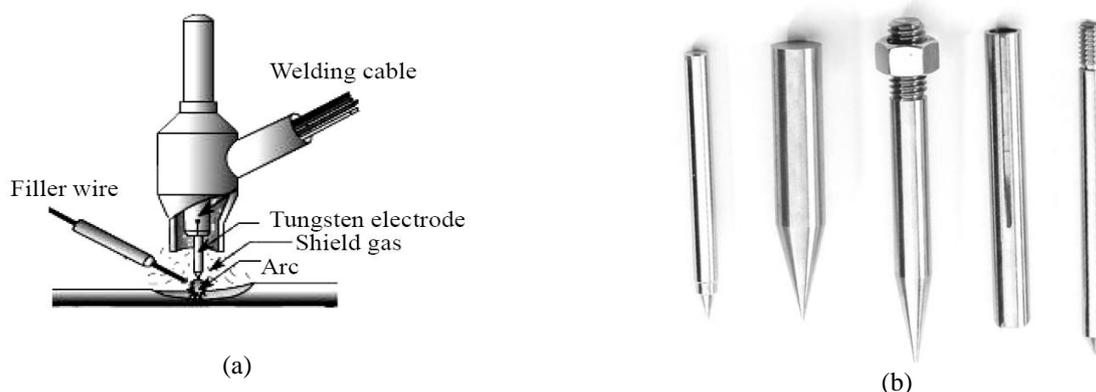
(a) Schematic of TIG welding Process (b) Variety of tungsten electrodes
